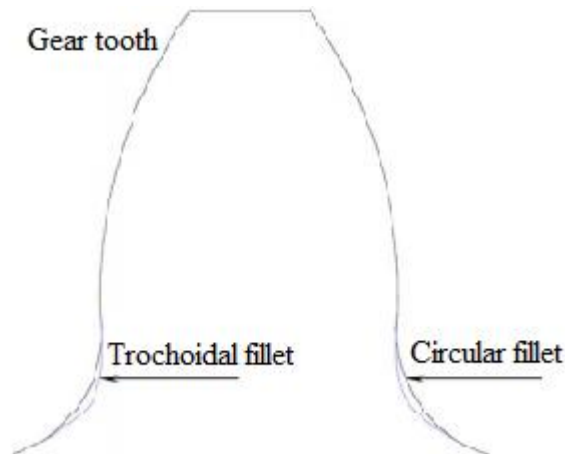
Superposition of circular fillet on a standard tooth (Sankar S. et al., 2011)
